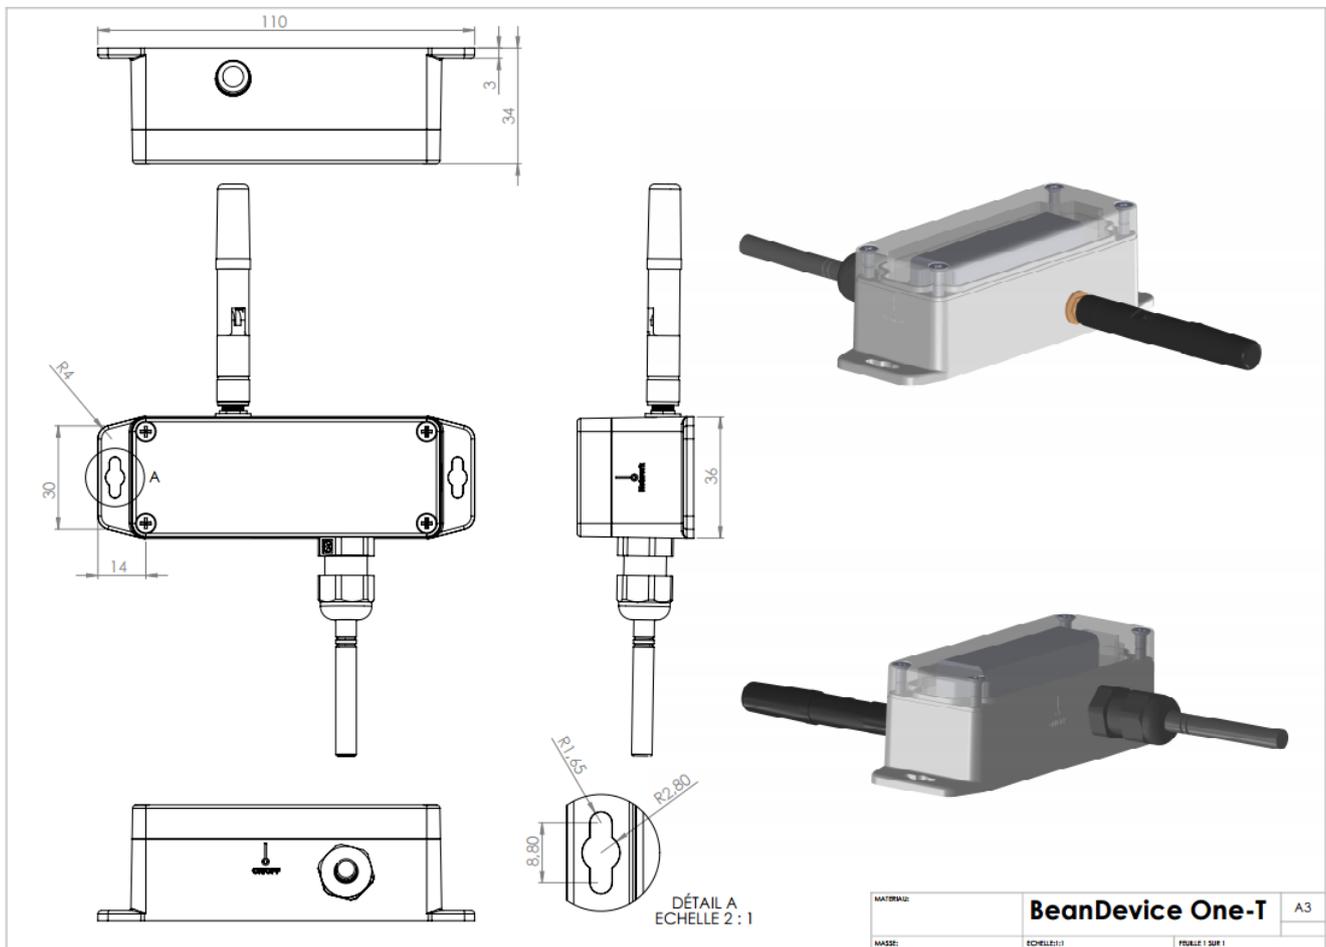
Beandevic[®] ONE-T Mechanical drawing
